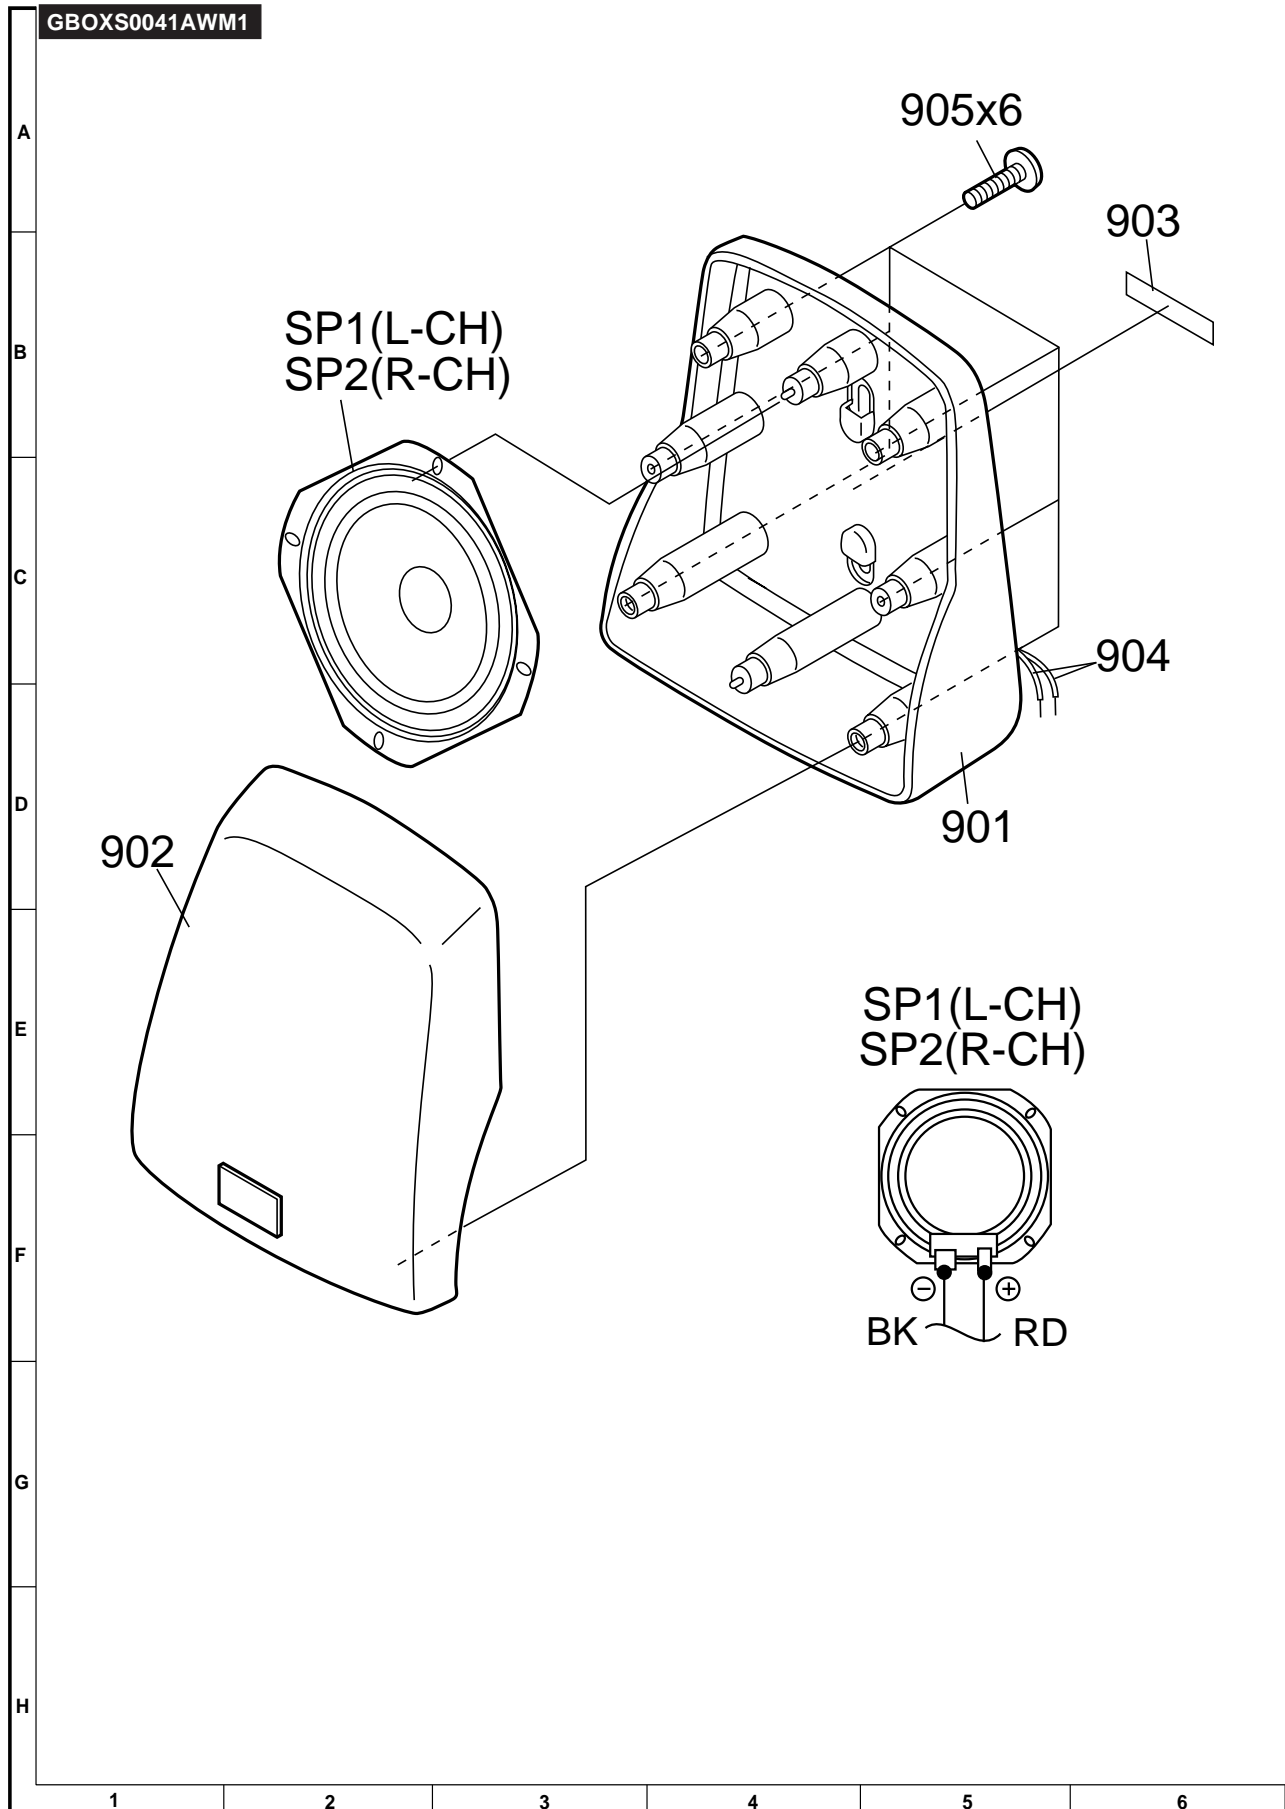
SPEAKER EXPLODED VIEW (3/3)
